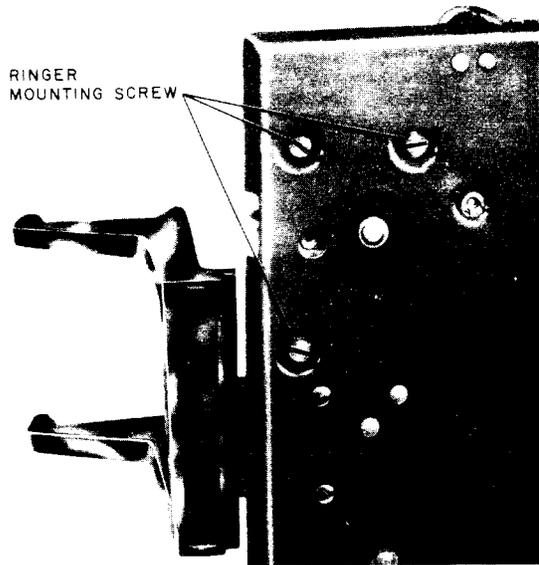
Location of Mounting Screws for N1A or T1A Ringers
